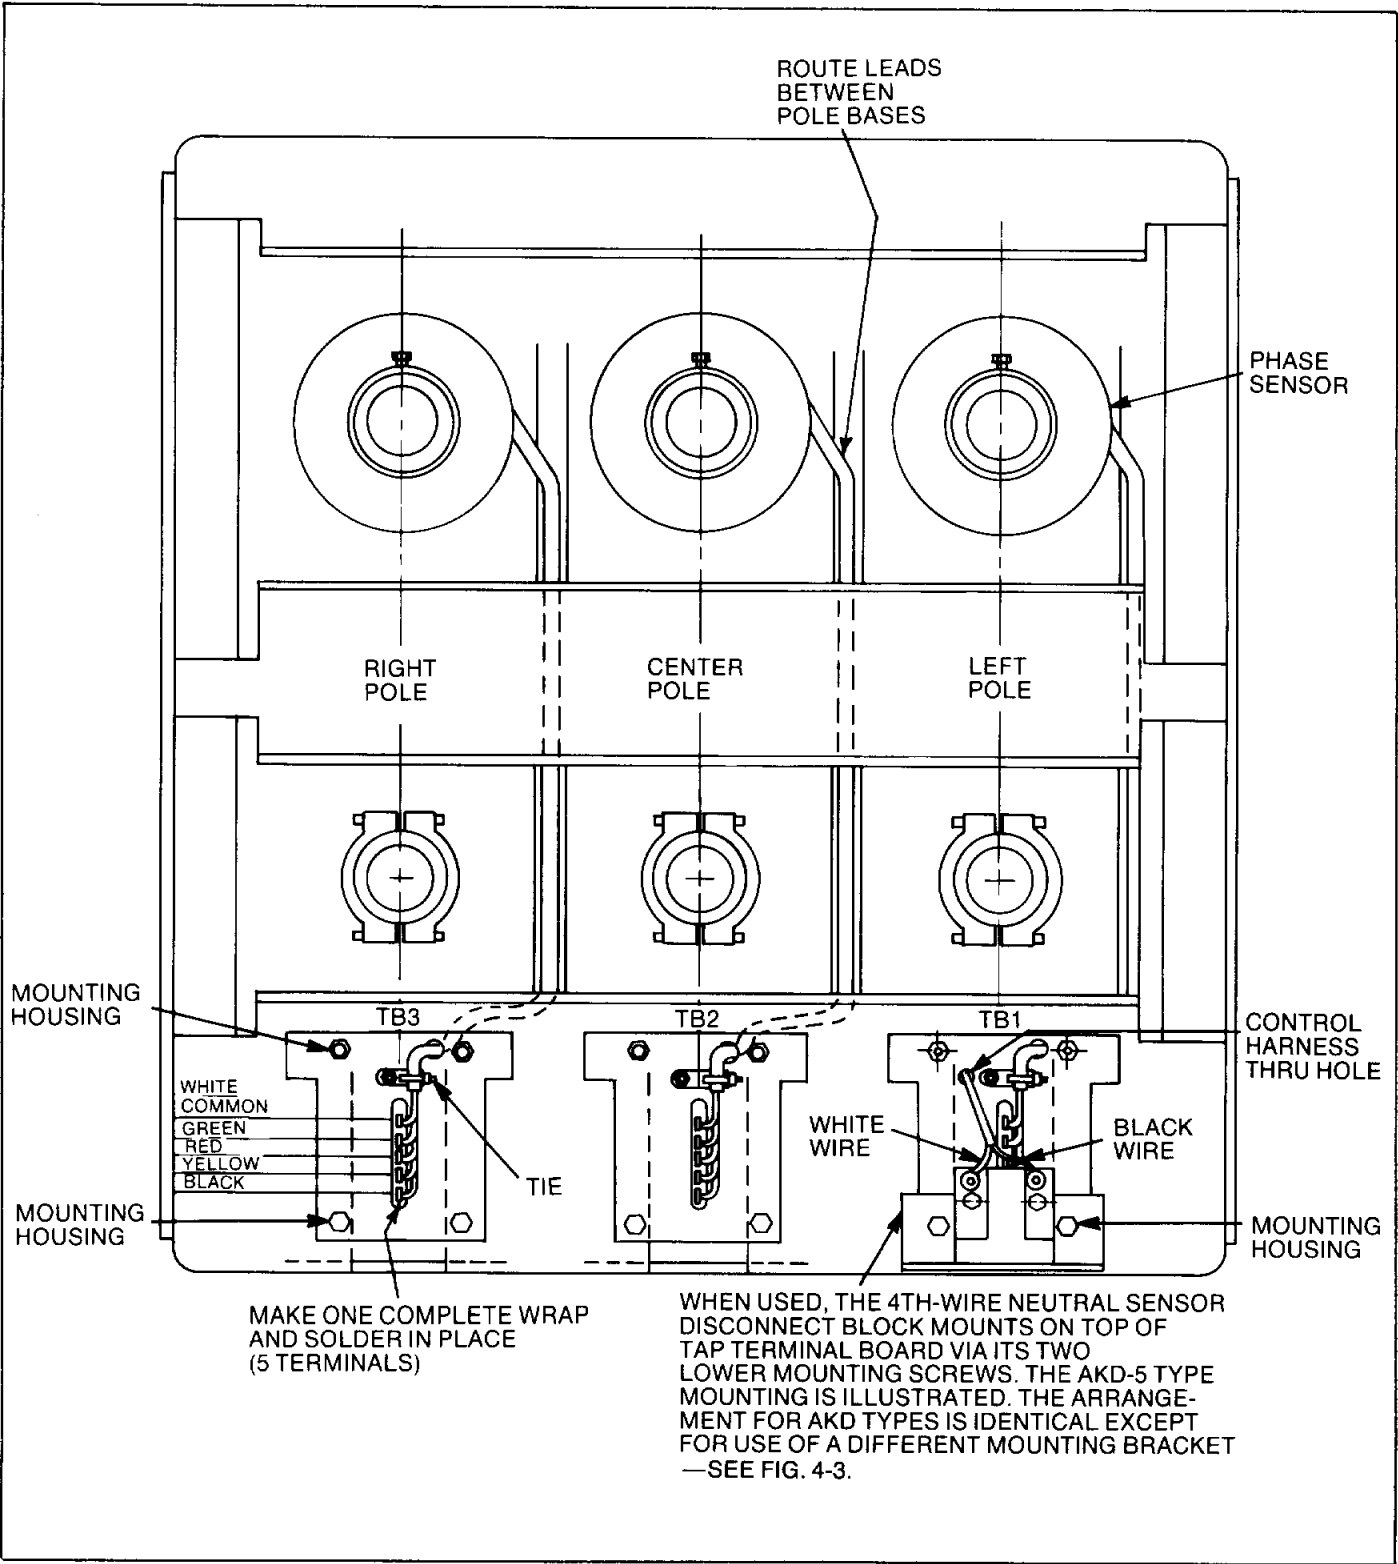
Typical AK-75/100 backframe conversion — rear view
